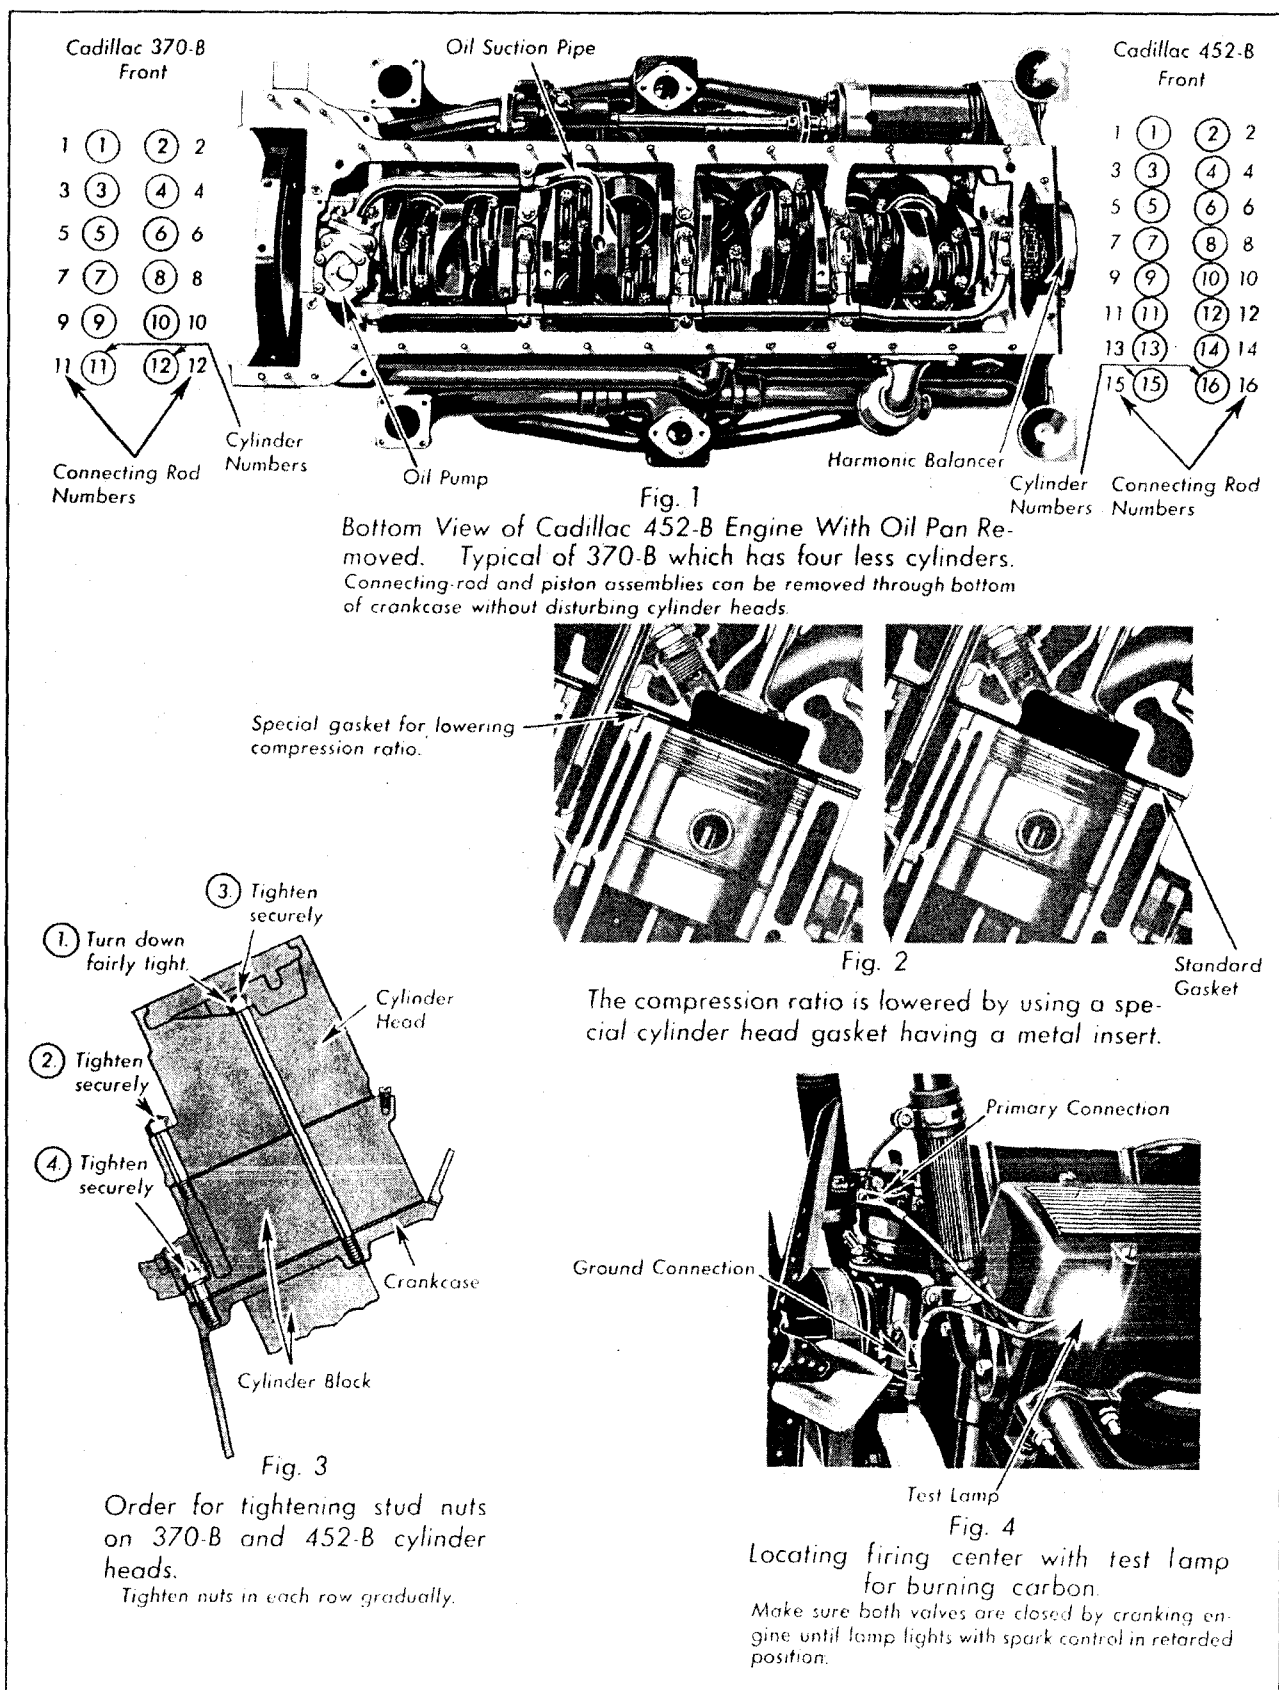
Bottom View of Engine and Cylinder Details—Cadillac 370-B and 452-B
